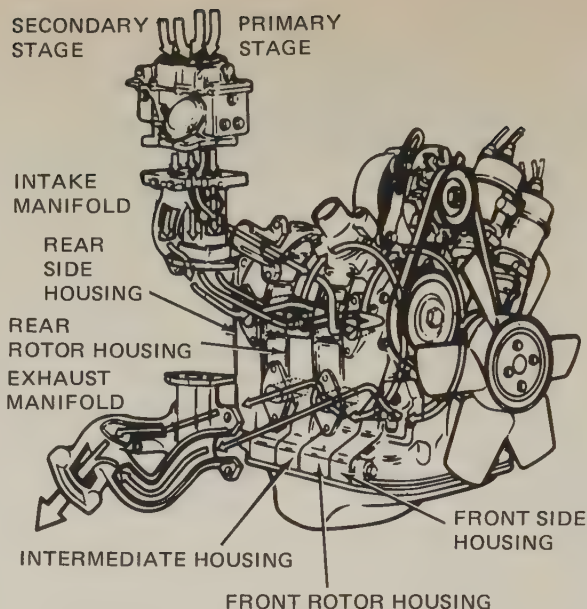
Location of the manifold and carburetor. (Toyo Kogyo Company, Ltd.)
